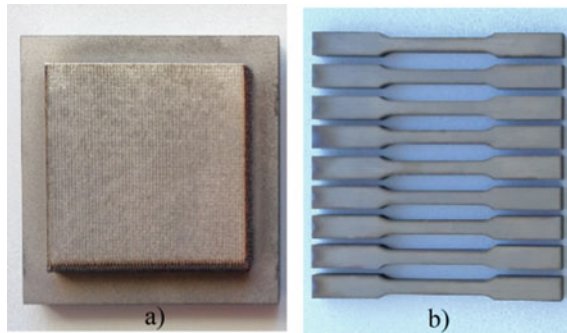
Ti10Ta block manufactured by additive manufacturing, a $10 \times 120 \times 120$ mm block b Nine test specimens obtained after cutting process (wire-EDM, with a brass wire)
